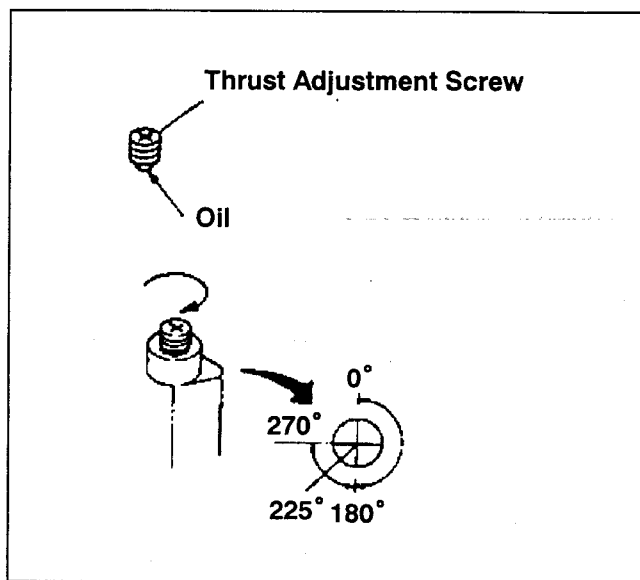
Adjustment of Thrust Adjustment Screw
